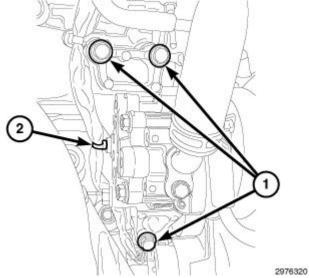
Power Steering Pump Heat Shield & Bolts Courtesy of CHRYSLER GROUP, LLC
